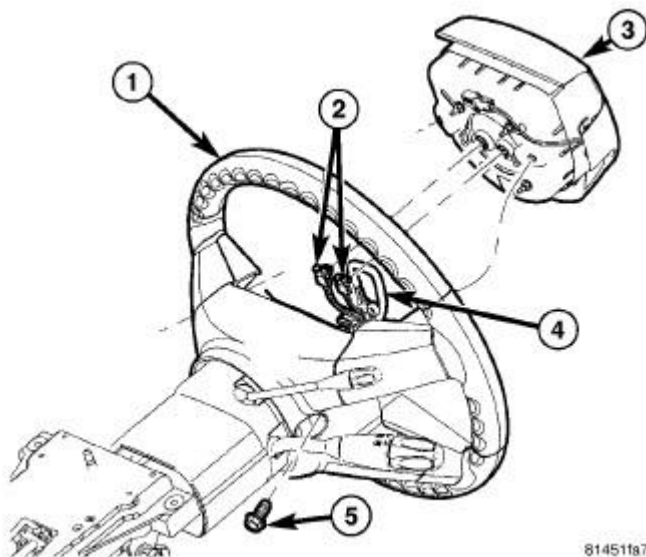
DRIVER AIRBAG REMOVAL & INSTALLATION
